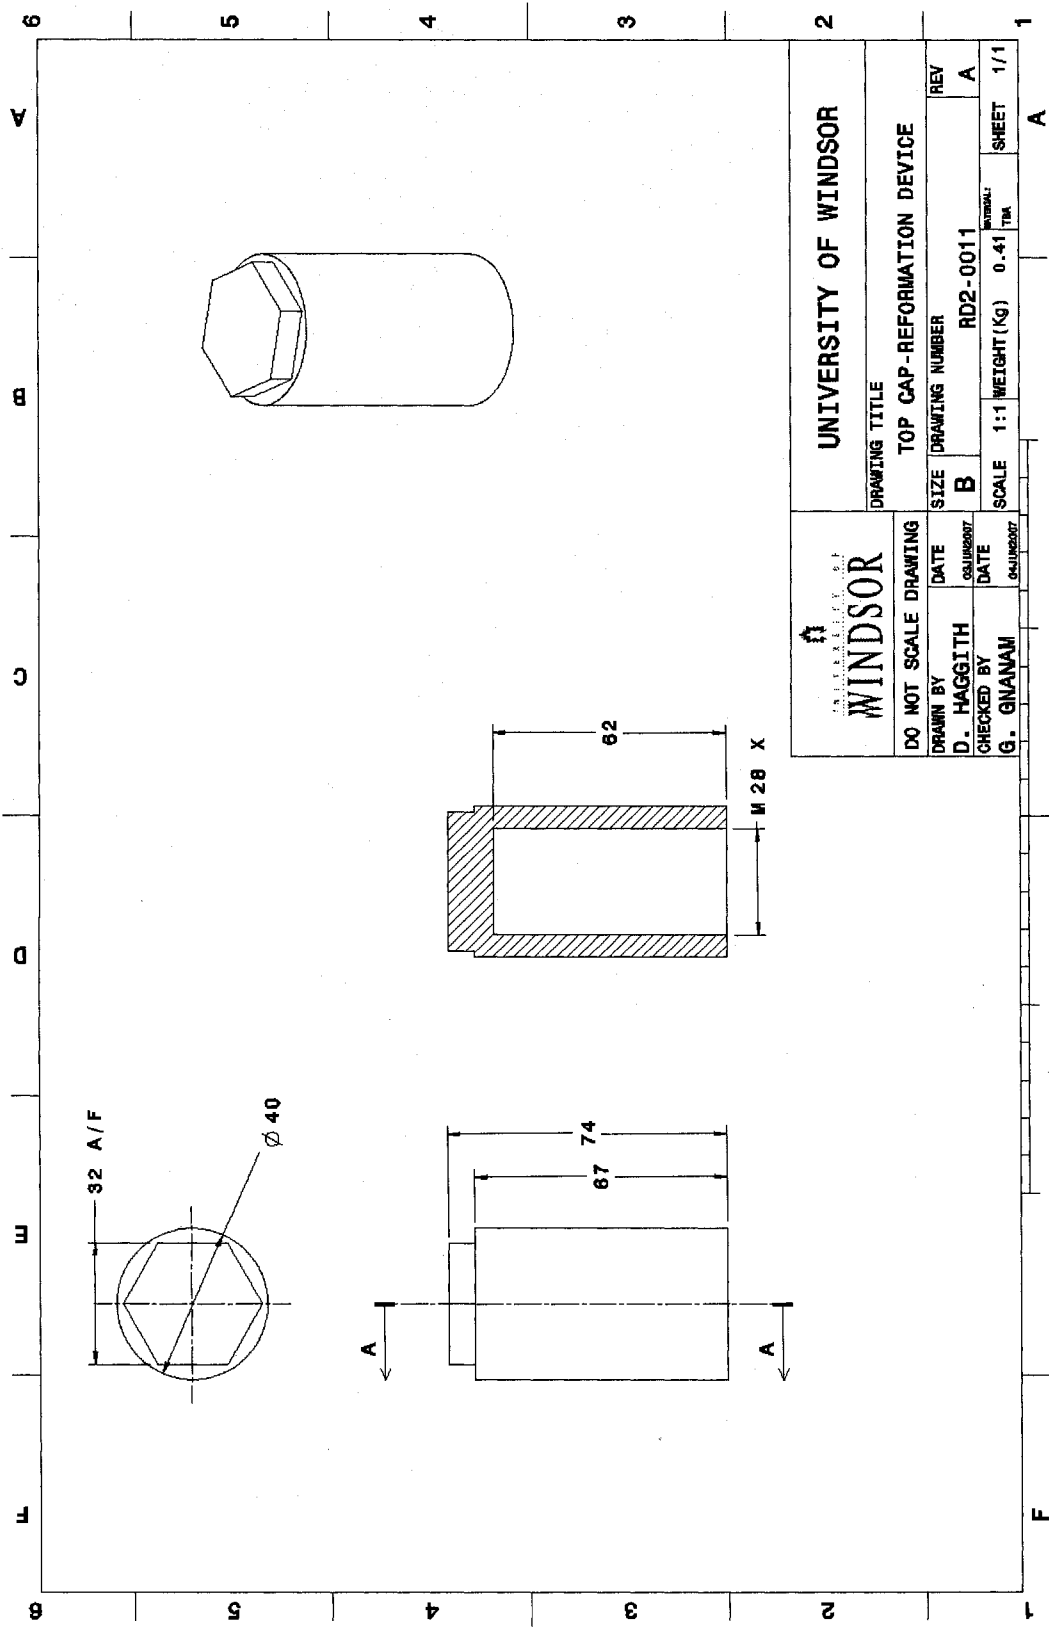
Top cap – Item 6 in assembly drawing (second proto-type).
